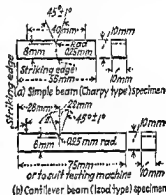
Impact Test Specimens (A.S.T.M. E23-34T).
